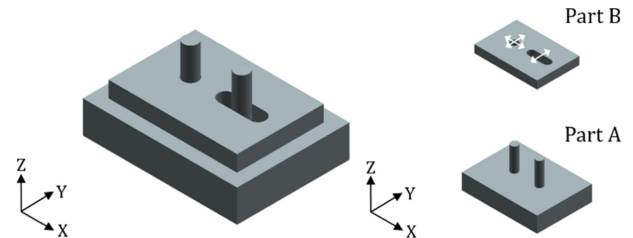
Exactly constrained assembly design with two pins in Part A and one hole and one slot in Part B
